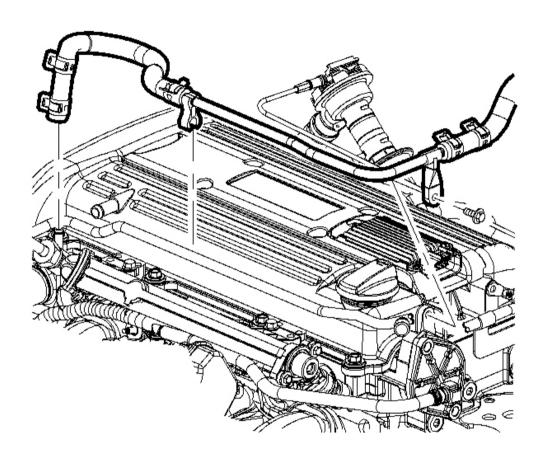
View Of Surge Tank Hose Courtesy of GENERAL MOTORS CORP.
